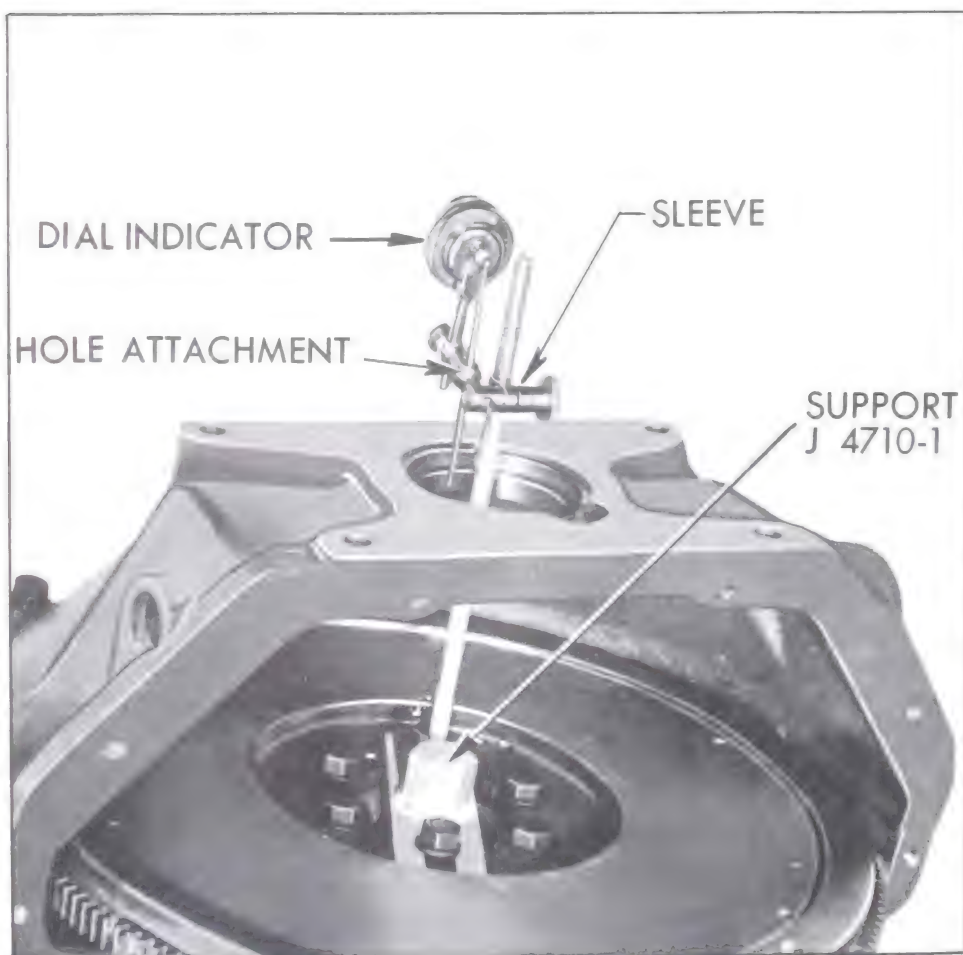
Checking Alignment of Housing at Pilot Hole
